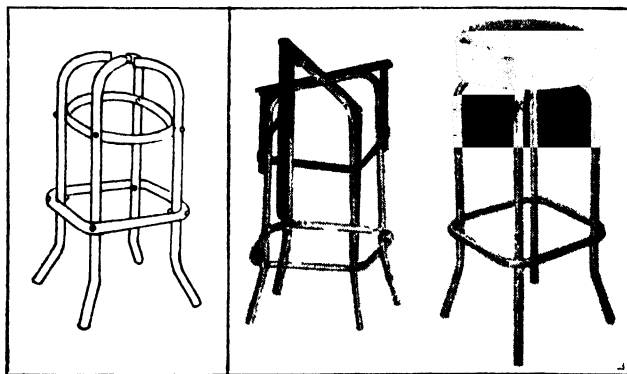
(left). Sketch of stool frame. Fig. 3. (center). Legs and foot rail in special jig for welding. Fig. 4. (right). The finished stool.
